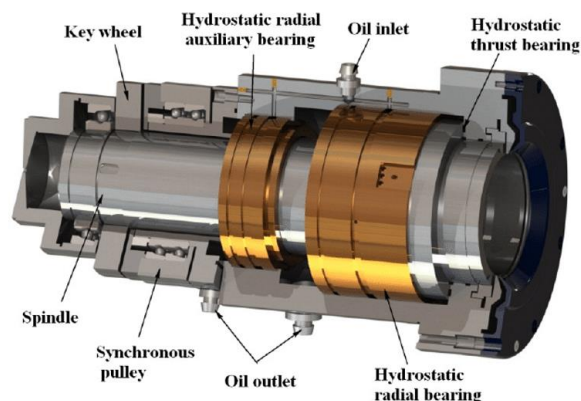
Motor spindle supported by hydrostatic bearings [3]
